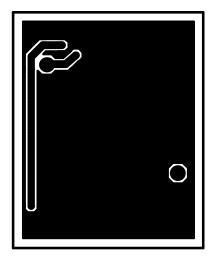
Bottom Layer, Typical PCB Layout (3.3V Output)
